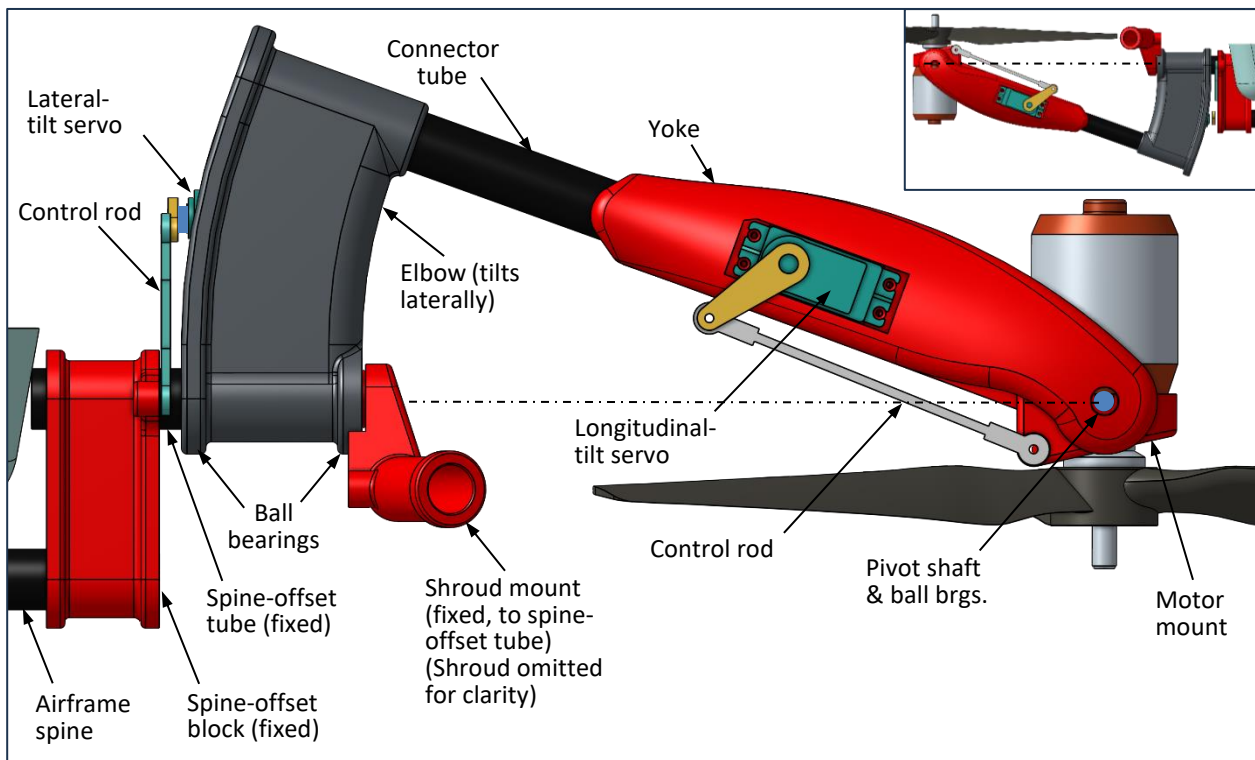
Detailed side view of *Ariel* tandem-rotor’s rear tilt-arm assembly mounted to (and rotating about) airframe’s spine-offset tube. Inset shows front tilt-arm assembly to be identical, just upside down.
